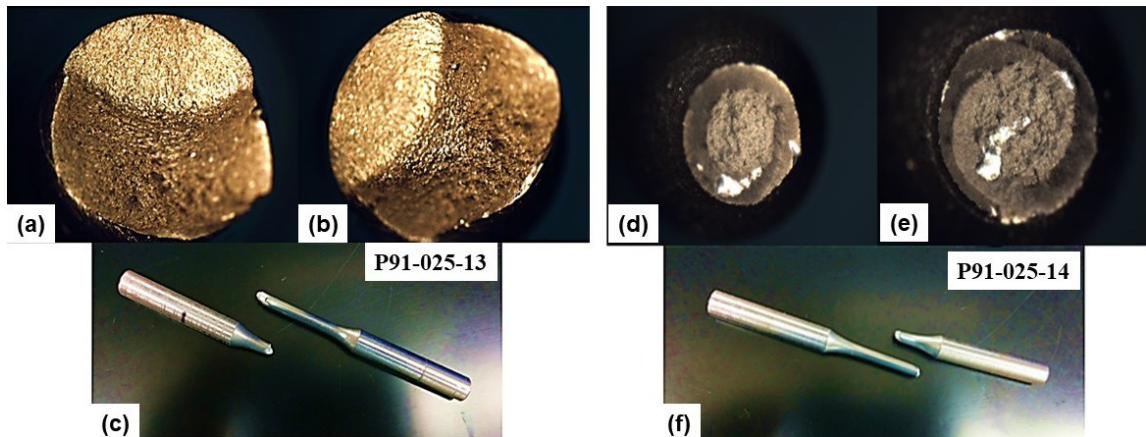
Broken specimen pictures. a) P91-025-13 fractured section taken by microscope; b) other half of the P91-025-13 fractured section; c) point of fracture; d) P91-025-14 fractured section taken by microscope; e) other half of the P91-025-14 fractured section; f) point of fracture.
